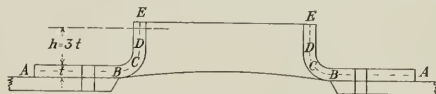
CROSS-SECTION OF FLANGED MANHOLE FRAME
